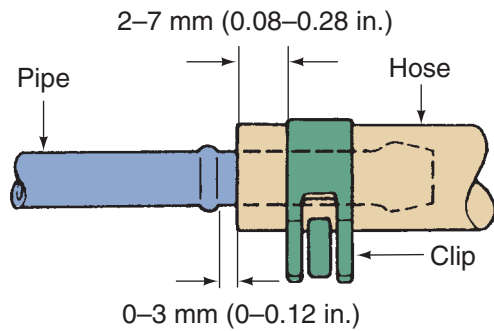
A fuel hose clamped to a steel tubing.
